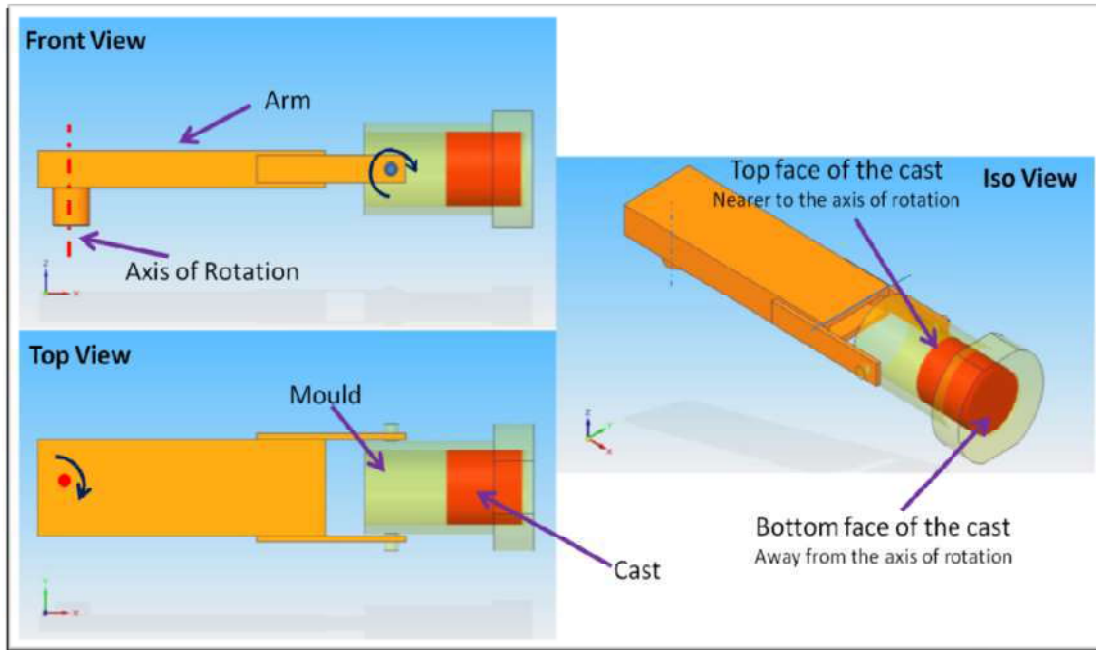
Figure showing arm, mold and casting of the centrifuge machine
